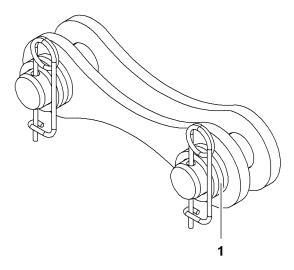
Mid-point suspension backstay shackle with pins on the main boom after the attached reducing piece
